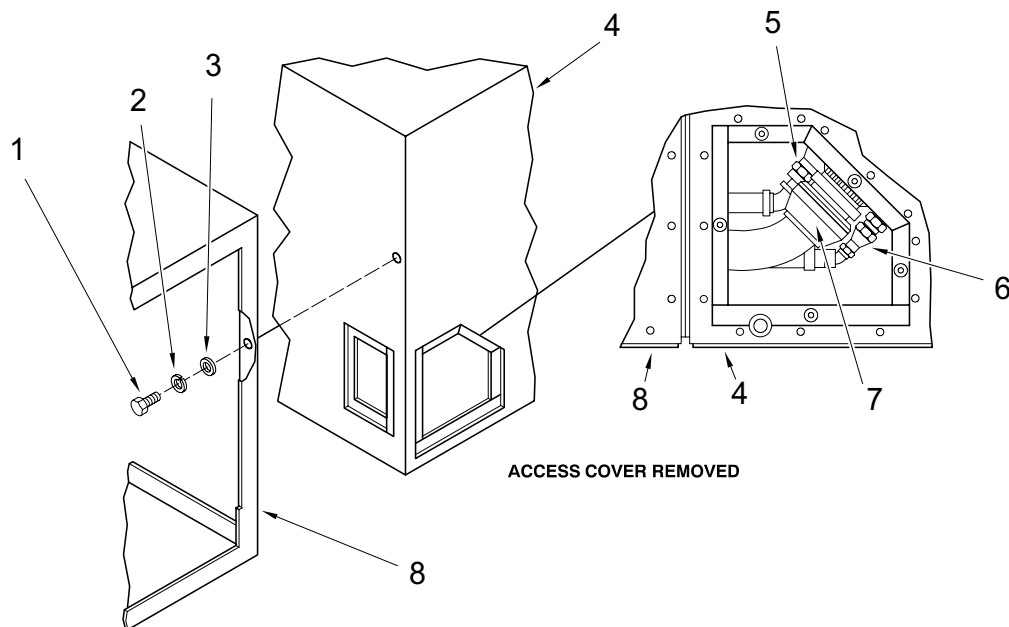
EVAPORATOR /CONDENSER ASSEMBLY - SEPARATION AND RECONNECTION.
